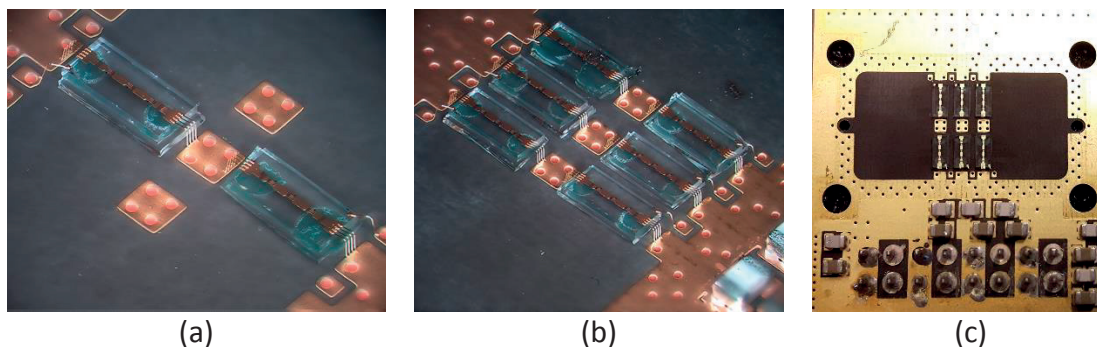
Photo of the assembled switches and PCB. (a) One-row configuration. (b) Three-row configuration. (c) A layout of the PCB. The cavity opening is 20.7 mm x 10.35 mm.
